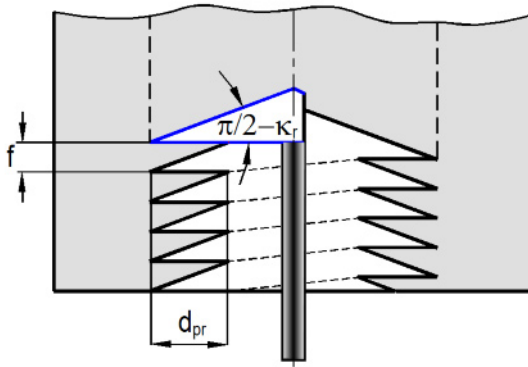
Profile of the hole drilled by the hypothetical drill shown in Fig. 3.27
